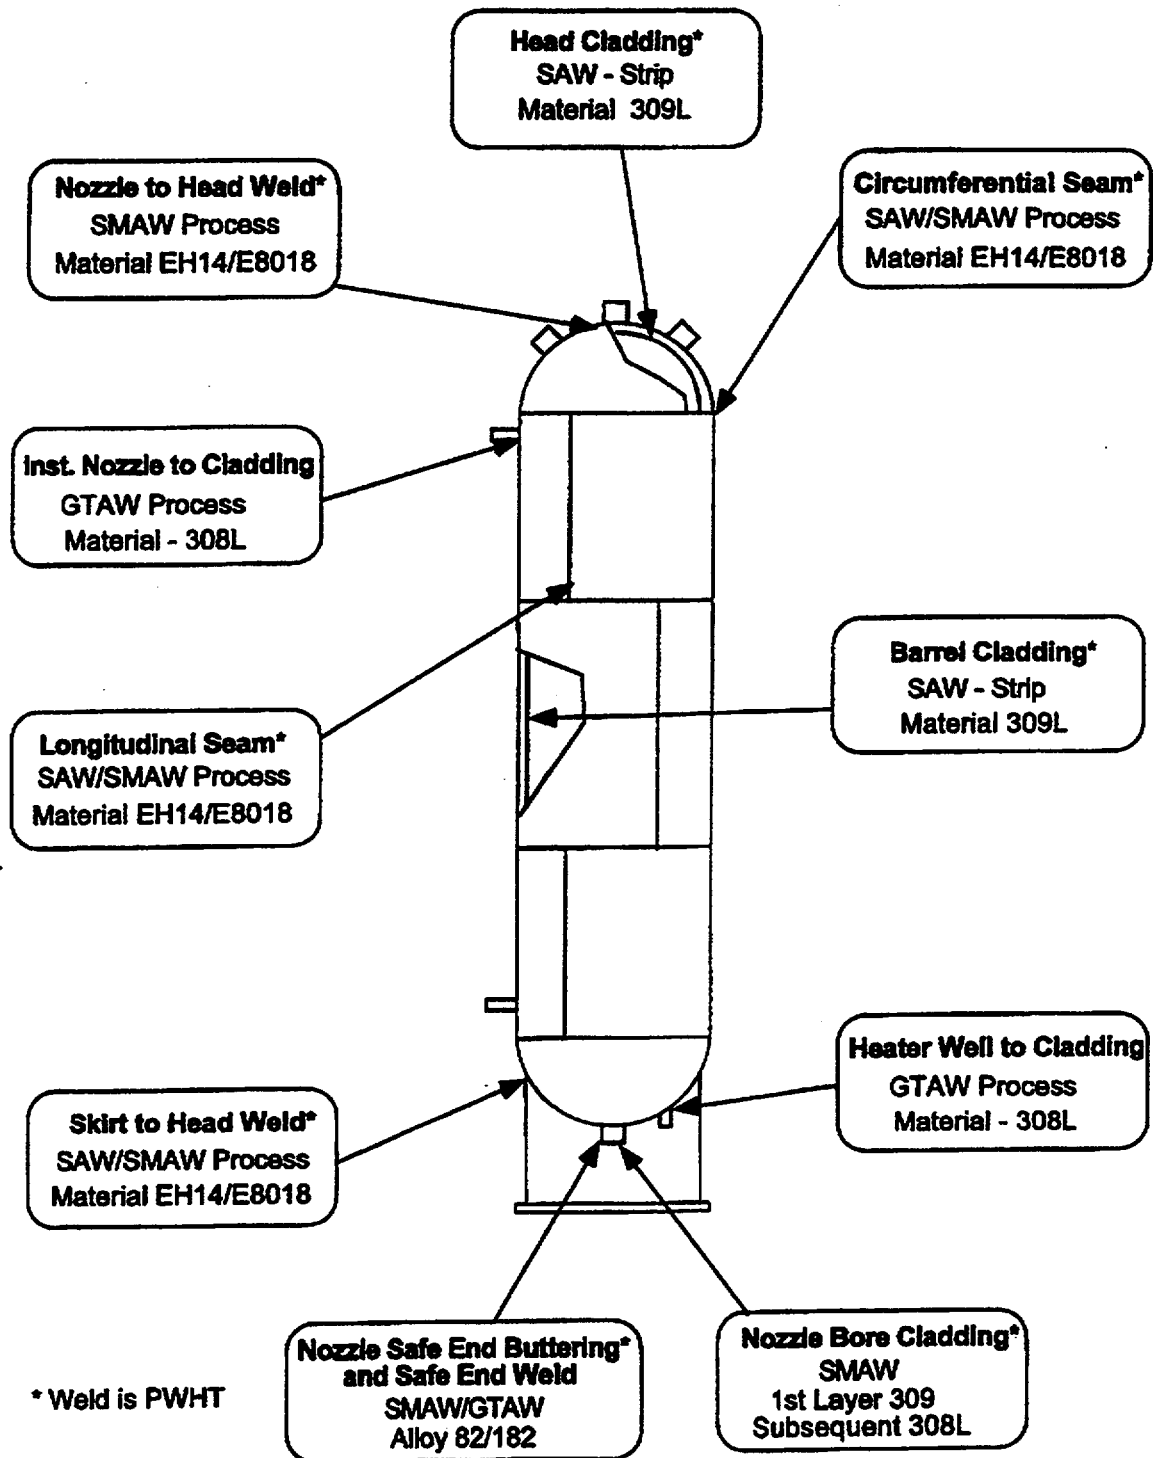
Pressurizer Welding Processes and Weld Materials
